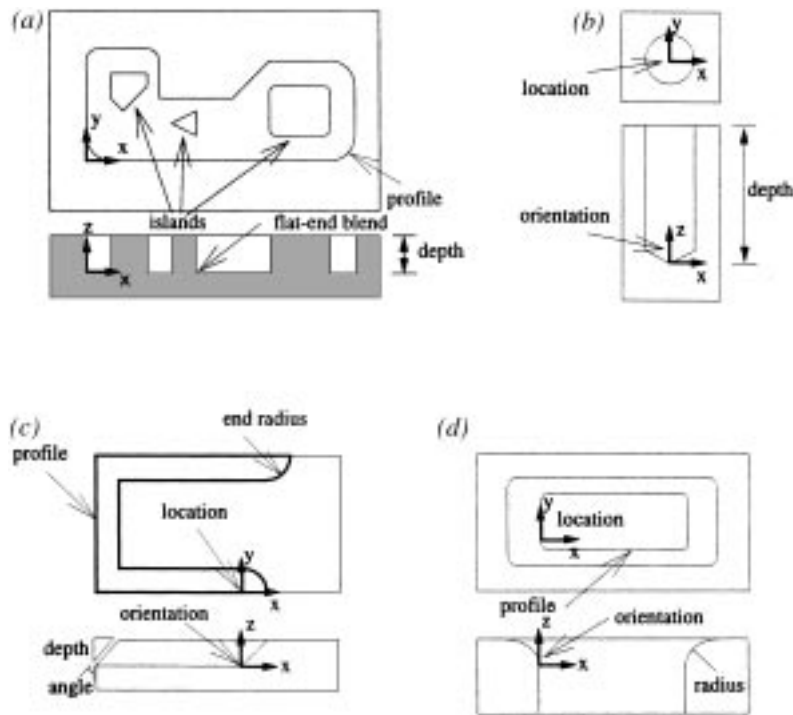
Machining features: (a) pocket, (b) hole, (c) chamfer, and (d) round.
